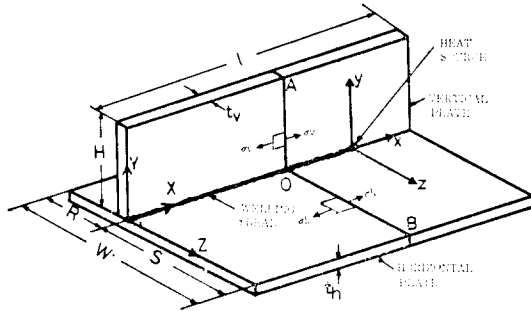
Welding in T shape if $S=R-t_v$,
